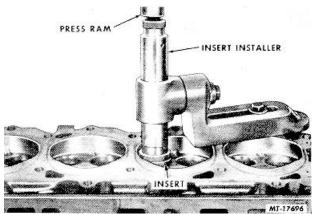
Using Insert Installer from SE-1797 Tool Set to Press In Intake
